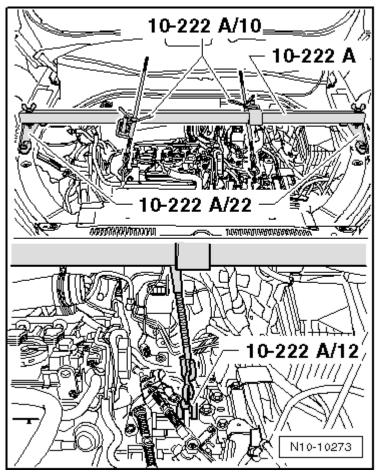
Identifying Engine Support Bridge 10-222 A And Special Tools Courtesy of AUDI OF AMERICA, LLC
